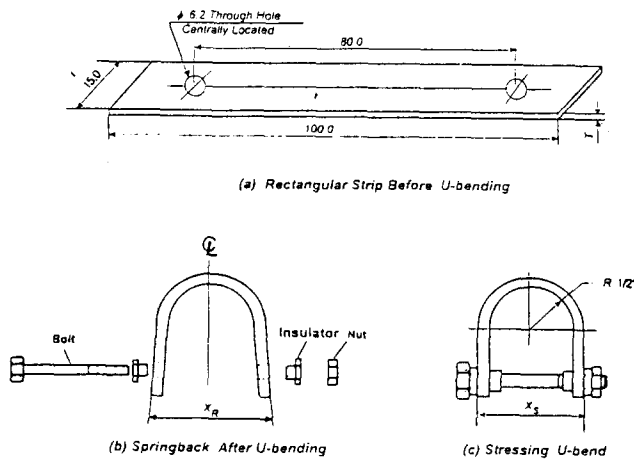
Dimension of rectangular strip and stressed U-bended specimen; (a) rectangular strip before U-bending, (b) springback after U-bending and (c) stressing U-bend
